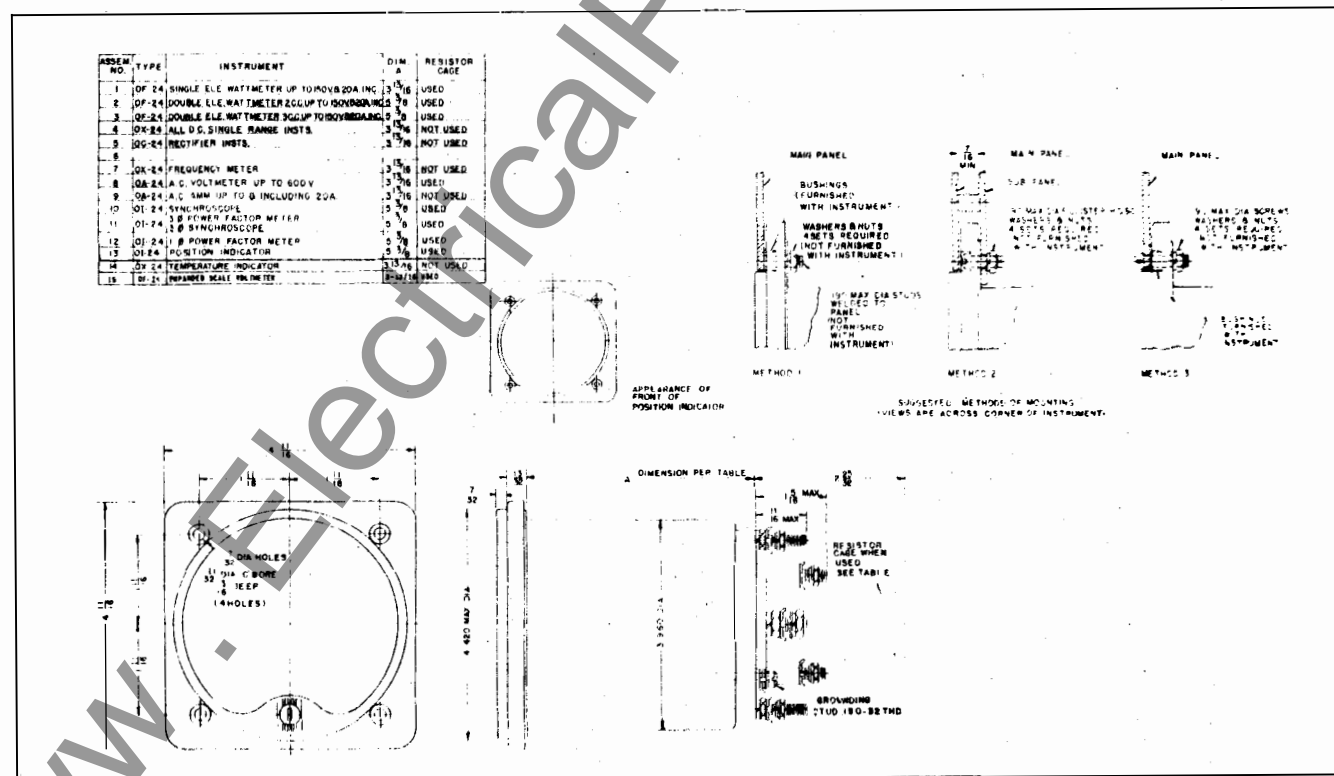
Outline Dimensions and Drilling Plan for Type O-24 Instruments.
